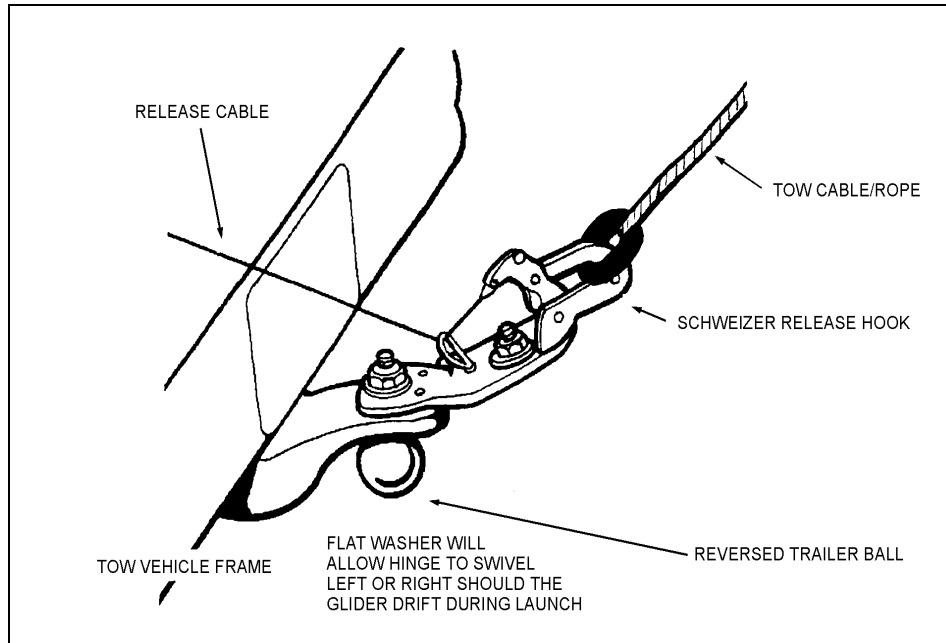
Typical Auto Tow Hitch Assembly
